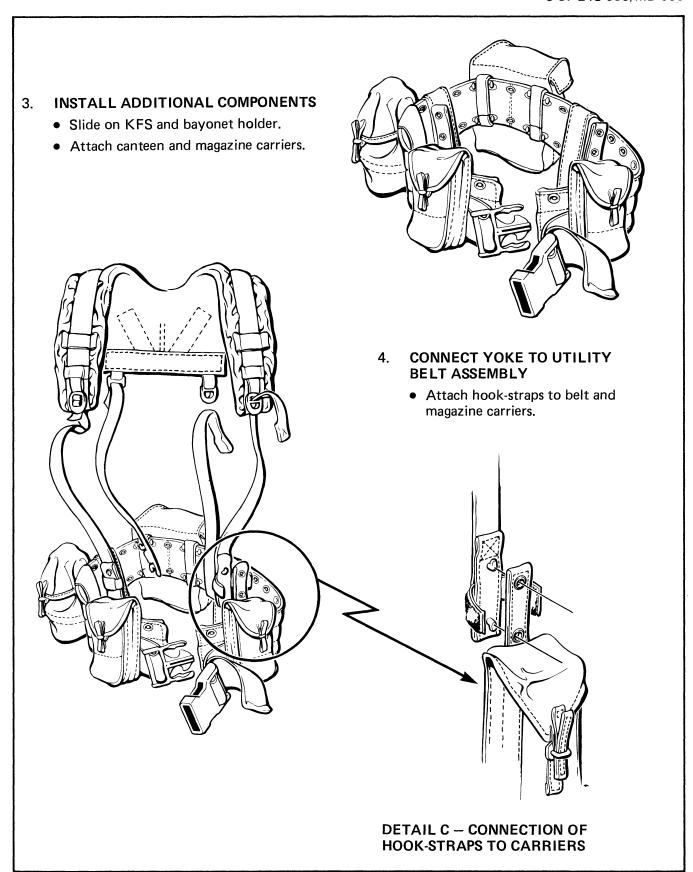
(Sheet 3 of 4) Fighting Order — Assembly Steps
